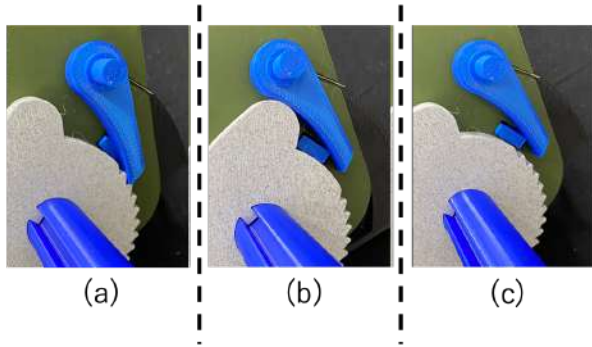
Mechanism operation, (a) is locked, (b) the stopper has been actuated, (c) the stopper is about to lower in the original position
